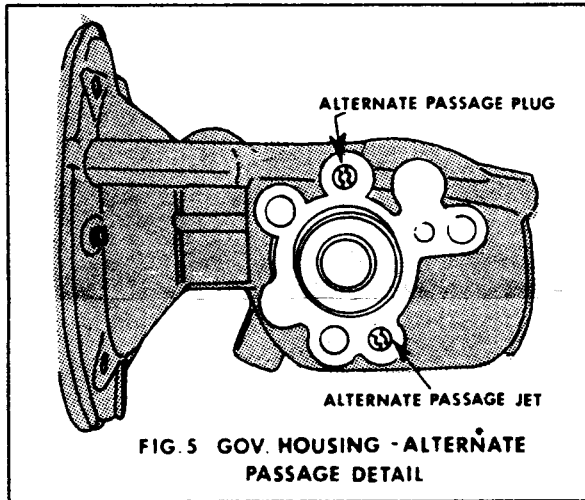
GOV. HOUSING - ALTERNATE PASSAGE DETAIL
